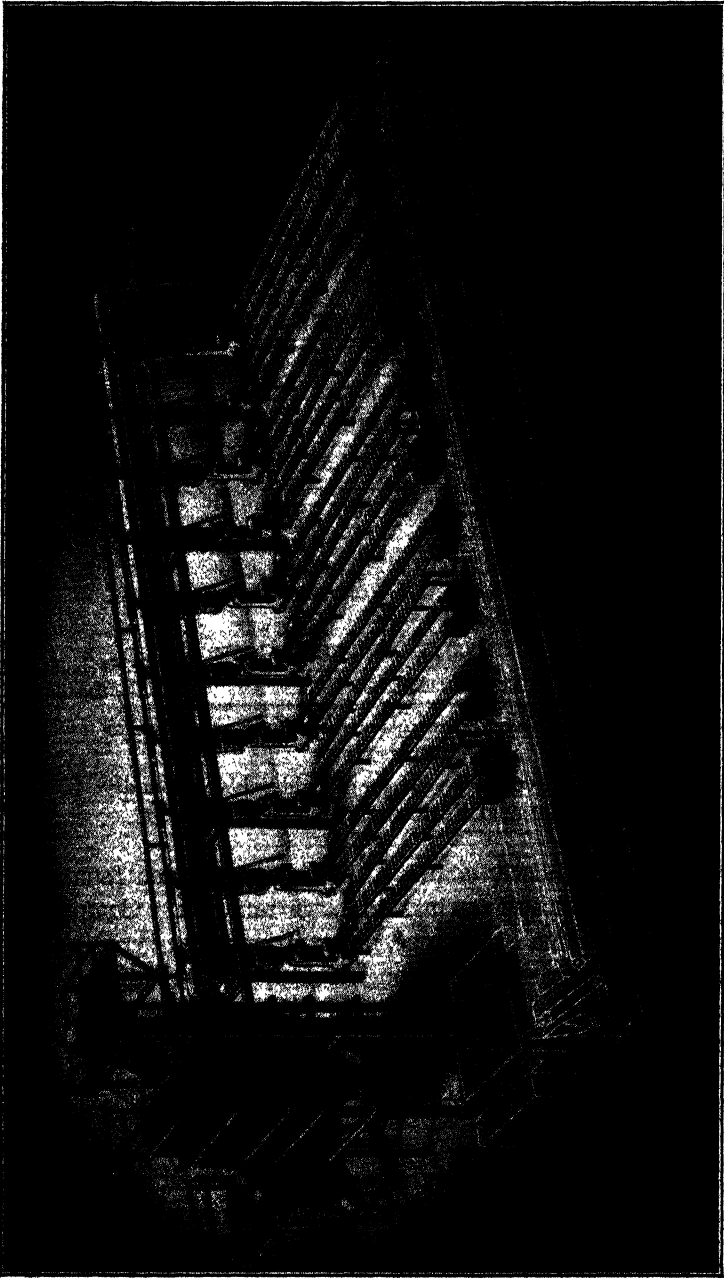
Mechanized mold production system using roller conveyors for transferring molds. (Courtesy of National Engineering Co., Chicago, Ill.)
